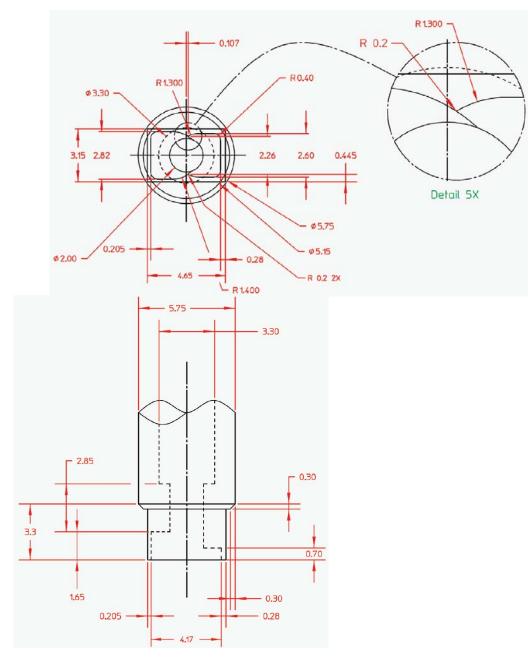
Dedicated LUXEON Rebel pick-up nozzle design (units mm). The nozzle tolerances must account for the LED dimensions.
